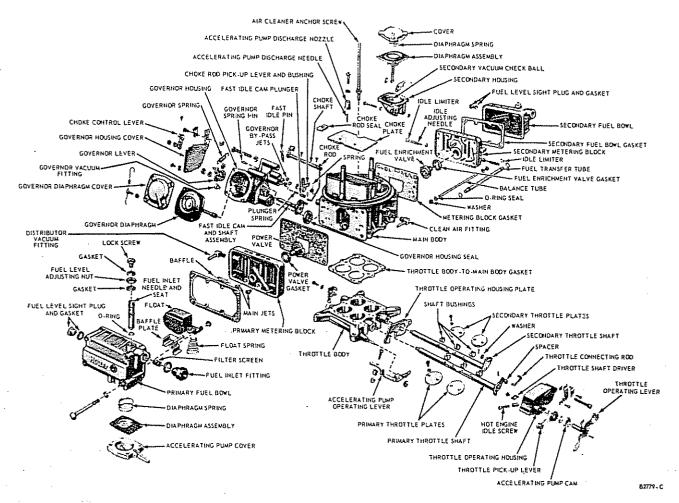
CARBURETOR ASSEMBLY — 4150 WITH GOVERNOR
